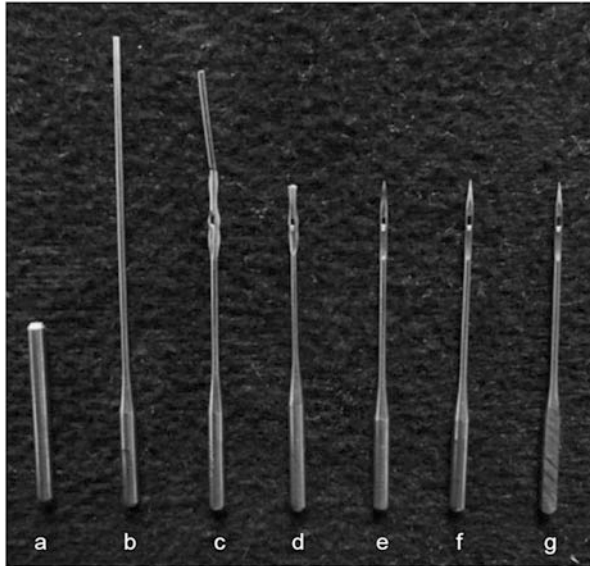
Sewing needle manufacture sequence by (a, b) forming technology, (c) die-cutting, (d, e) cutting, and (f, g) electroplating
